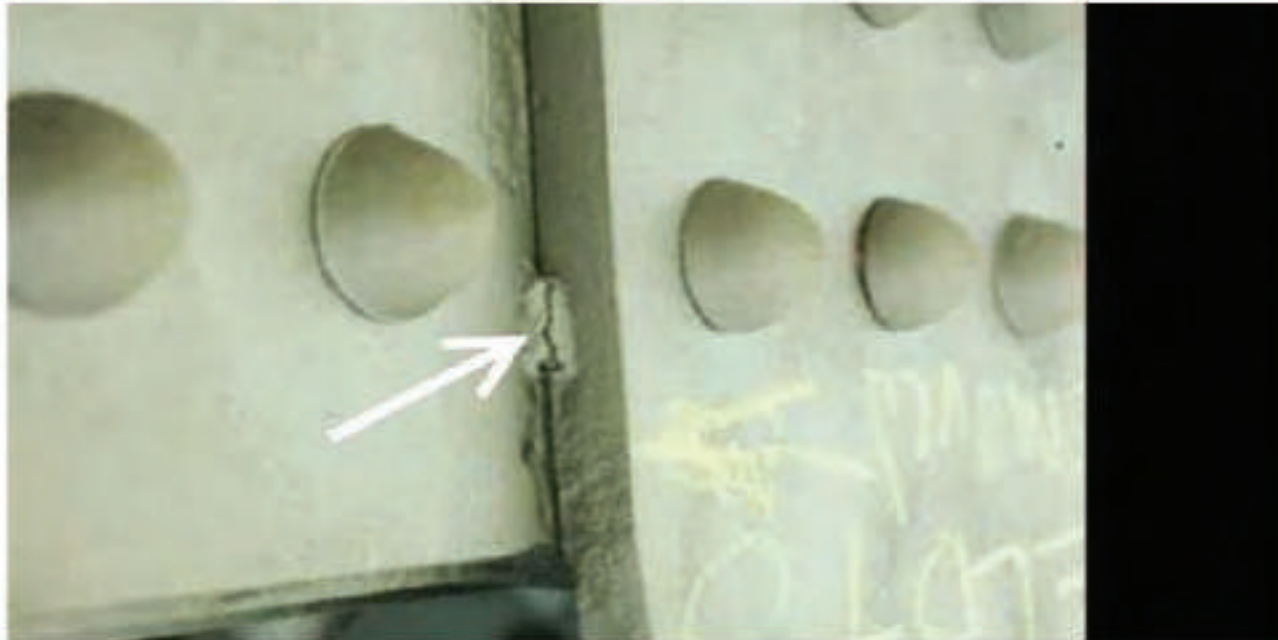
Cracked Tack Weld Requires Removal
